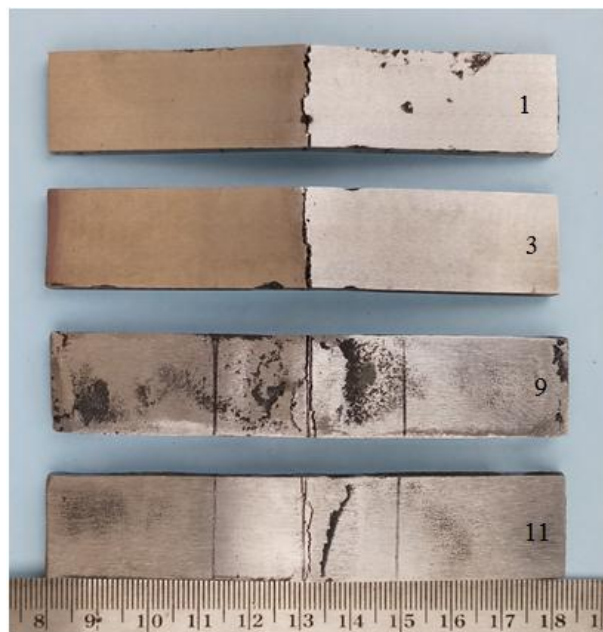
Fractured 3-point bend test specimens processed at 900W
